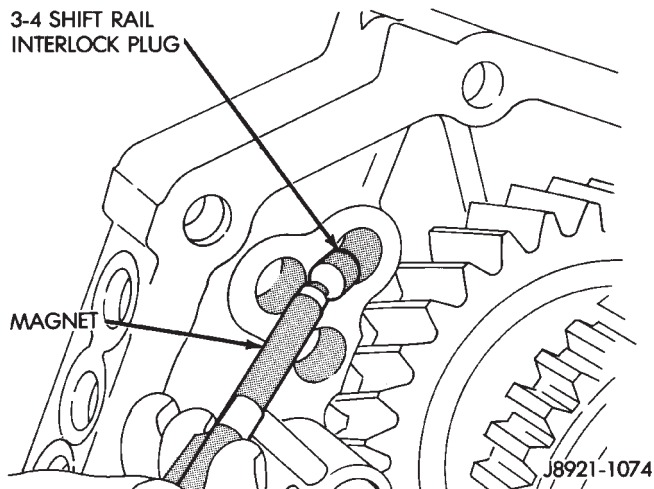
Removing 3-4 Shift Rail Interlock Plug
